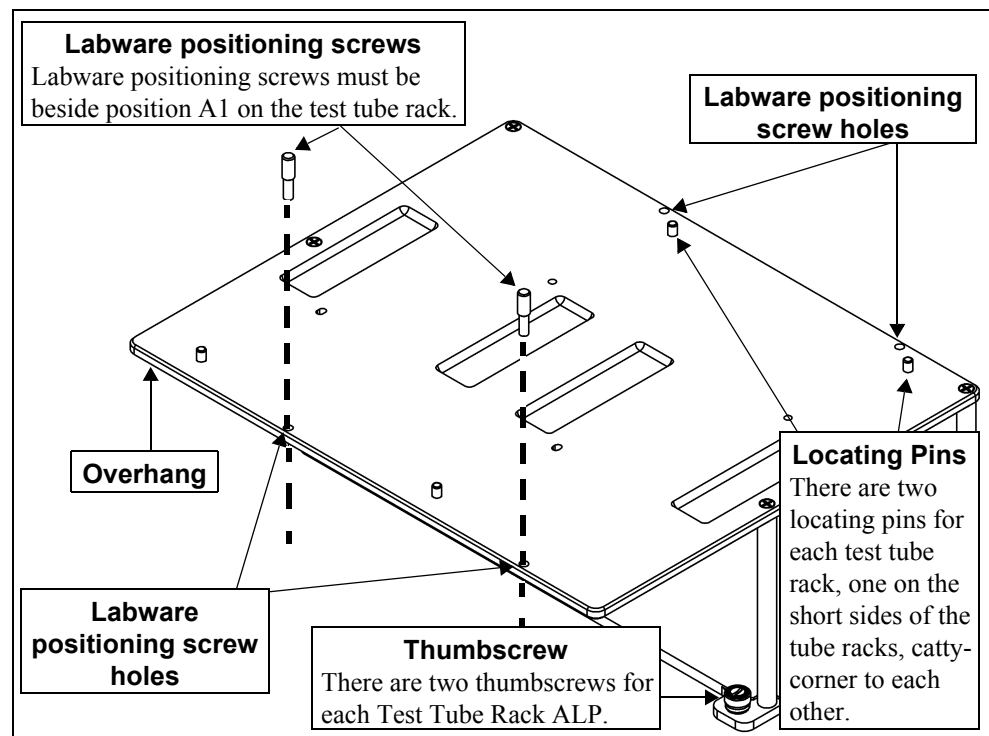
Labware positioning screws on a 1 x 2 Test Tube Rack ALP (left facing)
